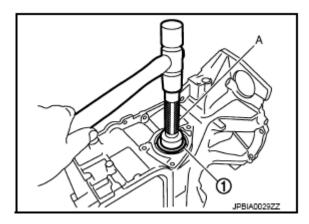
Installing Axle Pipe To Oil Pan (Upper) From Axle Pipe Flange Side (Left Side)
